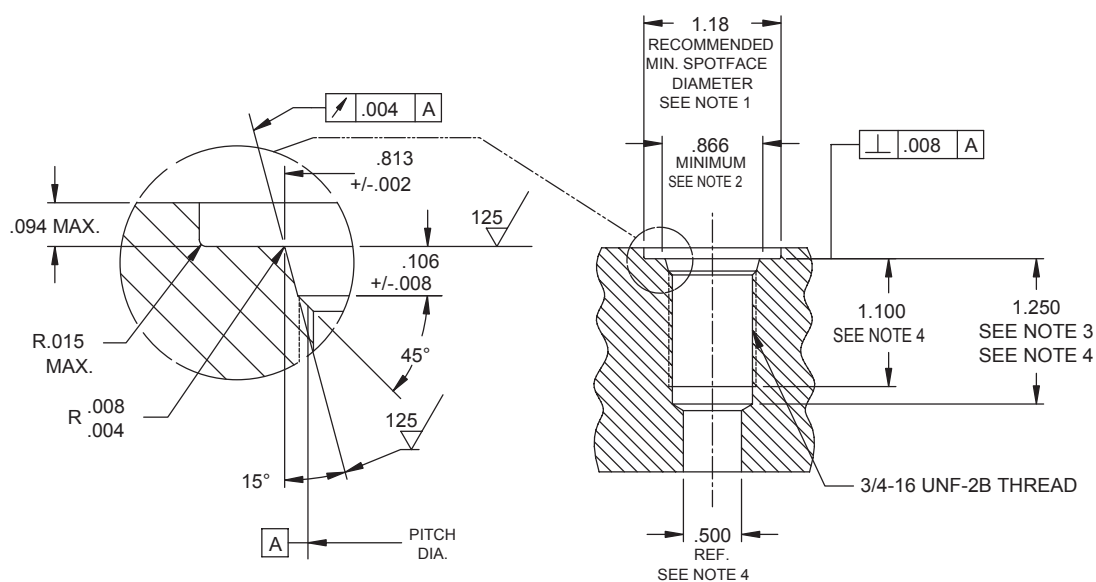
Mounting LDT in a Hydraulic Cylinder
